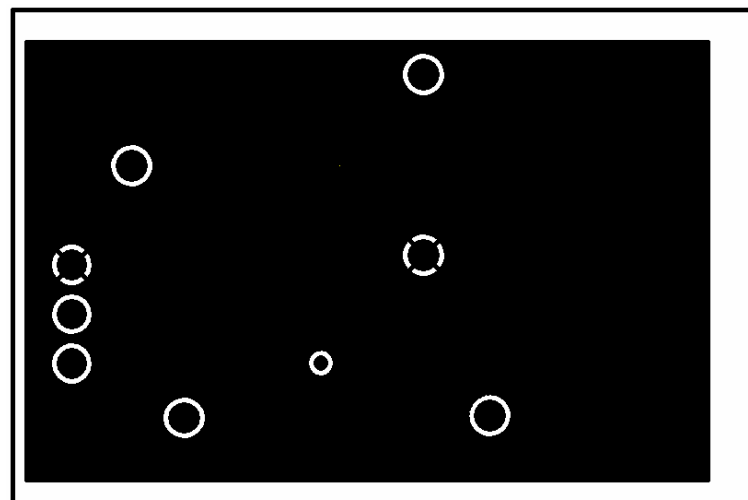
SP6691EB PC LAYOUT BOTTOM SIDE
